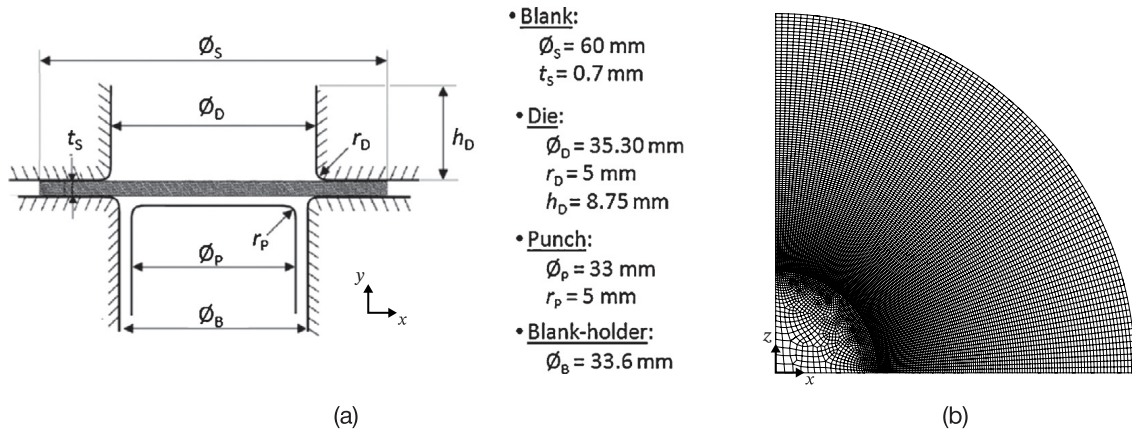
Schematic of the deep drawing cup test (dimensions in mm): (a) setup and geometry (Souto et al. 2015b) and (b) finite element mesh used in the blank.
